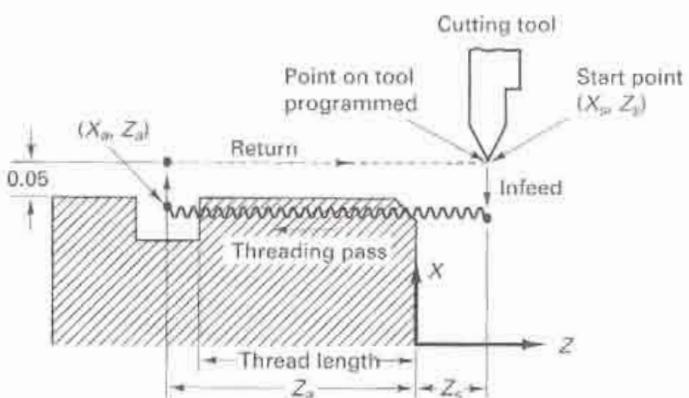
Canned subroutines called G codes are used on CNC lathes to produce threads. See Chapter 26 for CNC discussion.
